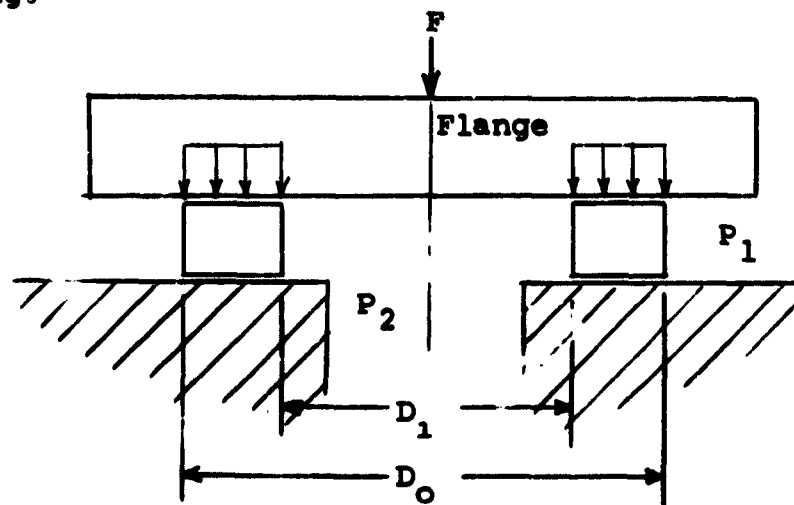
Uniform Pressure Gradient Acting on Gasket-Flange Assembly
